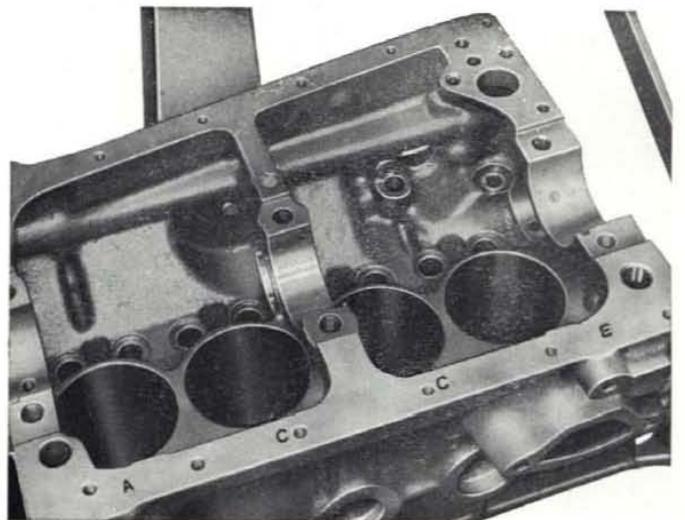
Letters showing cylinder bore classes on lower face of cylinder block.
